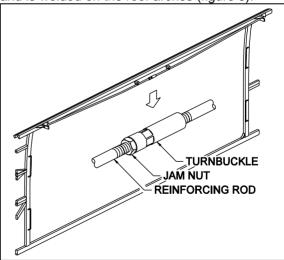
FRONT SLIDE-OUT ROOF REINFORCING
